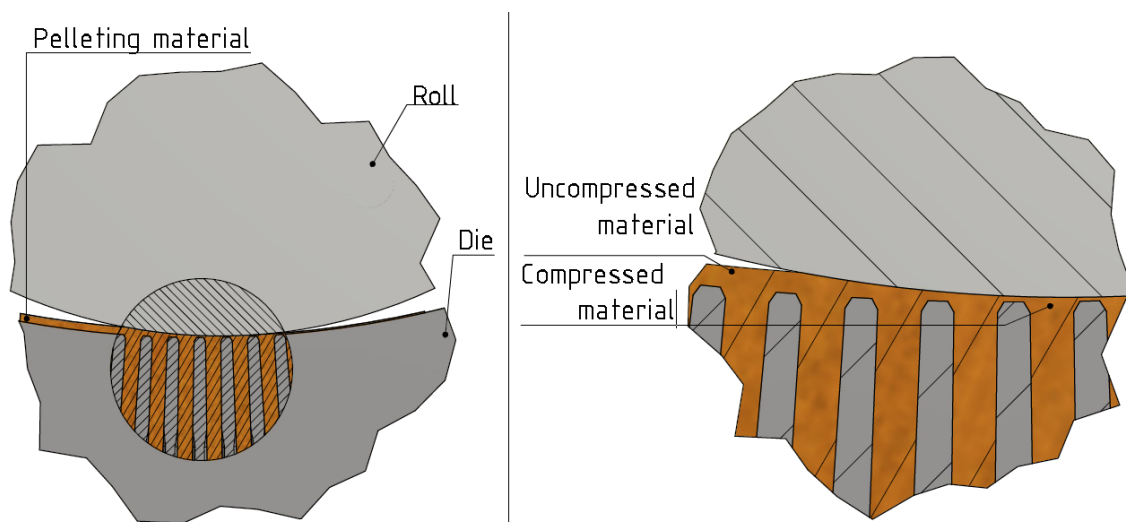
Cross sectional view of a roll compressing the pelleting material into the pellet channels.
